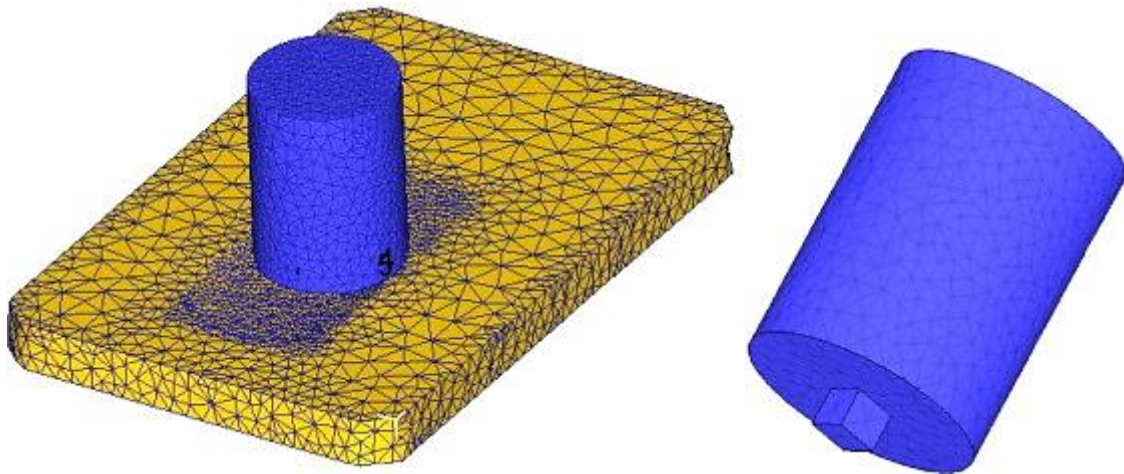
Schematic illustration of the FSP tool and workpiece [125].
